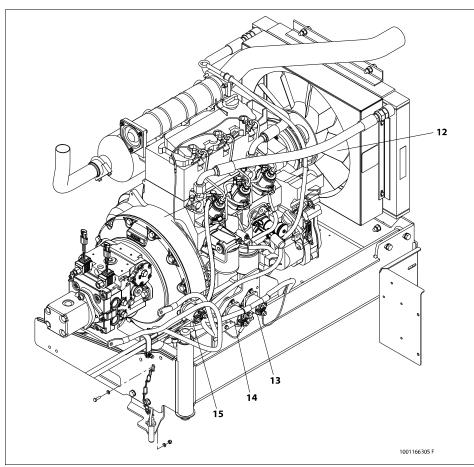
Deutz D2011L03 Engine Components - Sheet 2 of 3
